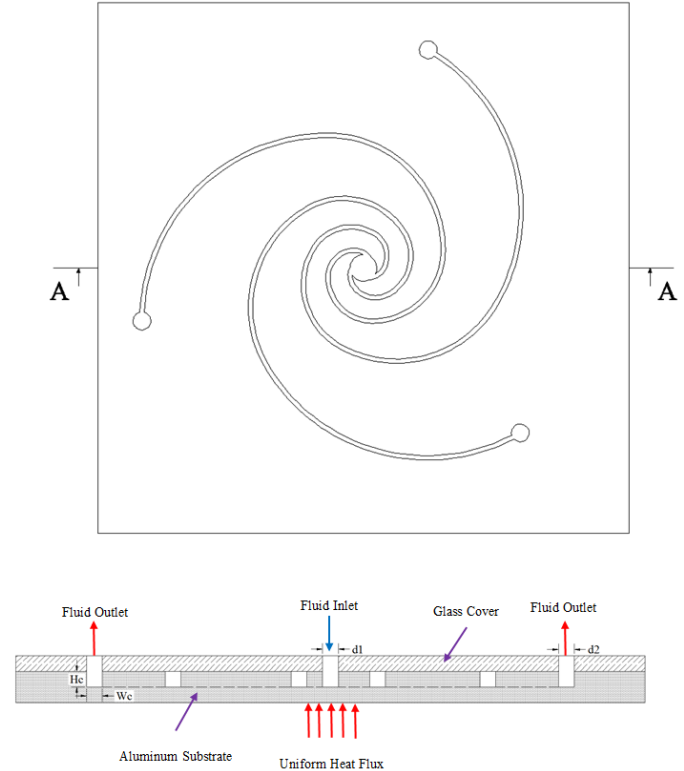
The cut view sketch of Fibonacci spiral channel design (A-A section)
